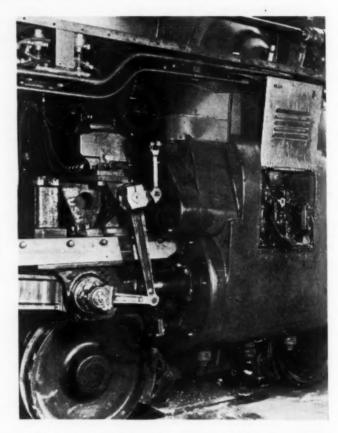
K-4 WITH POPPET VALVES: VALVE-GEAR ROCKERSHAFT AND CROSSHEAD CONNECTION
